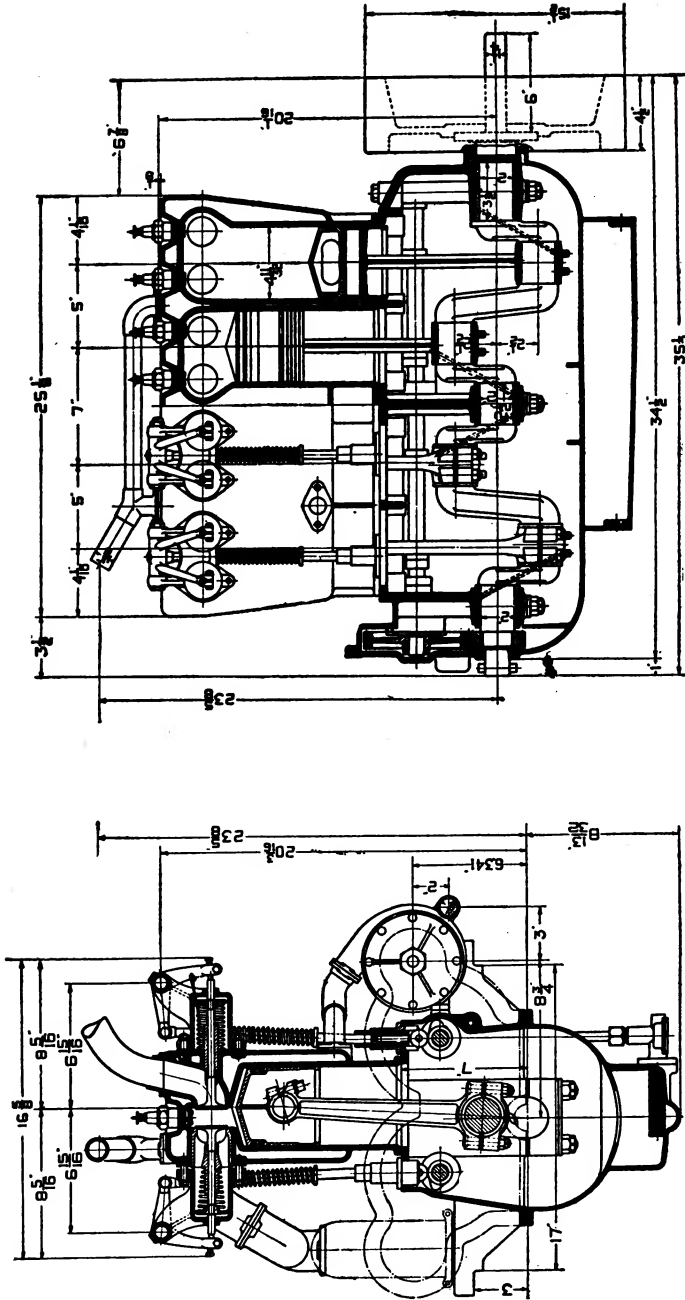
Sections through Wisconsin Sixteen-Valve Motor—Side and End Views
